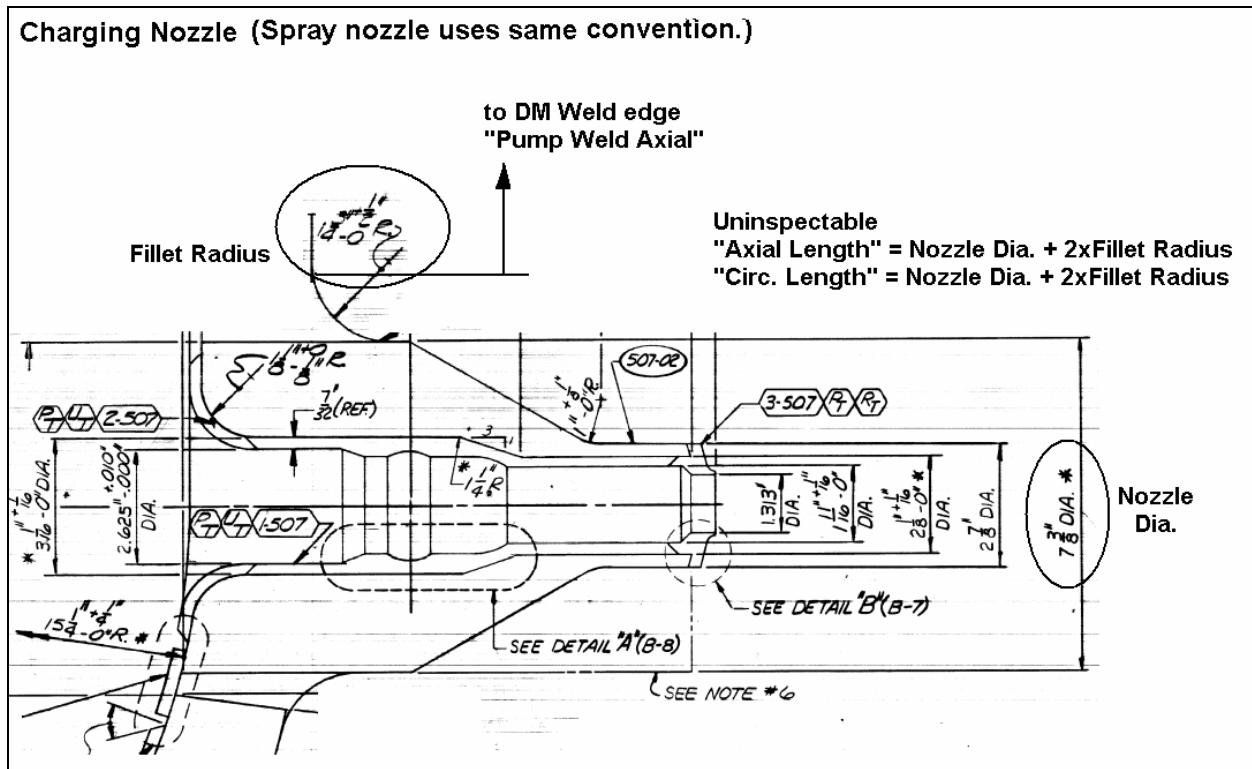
Sample Charging and Spray Nozzles Uninspectable and Obstruction Dimensions
